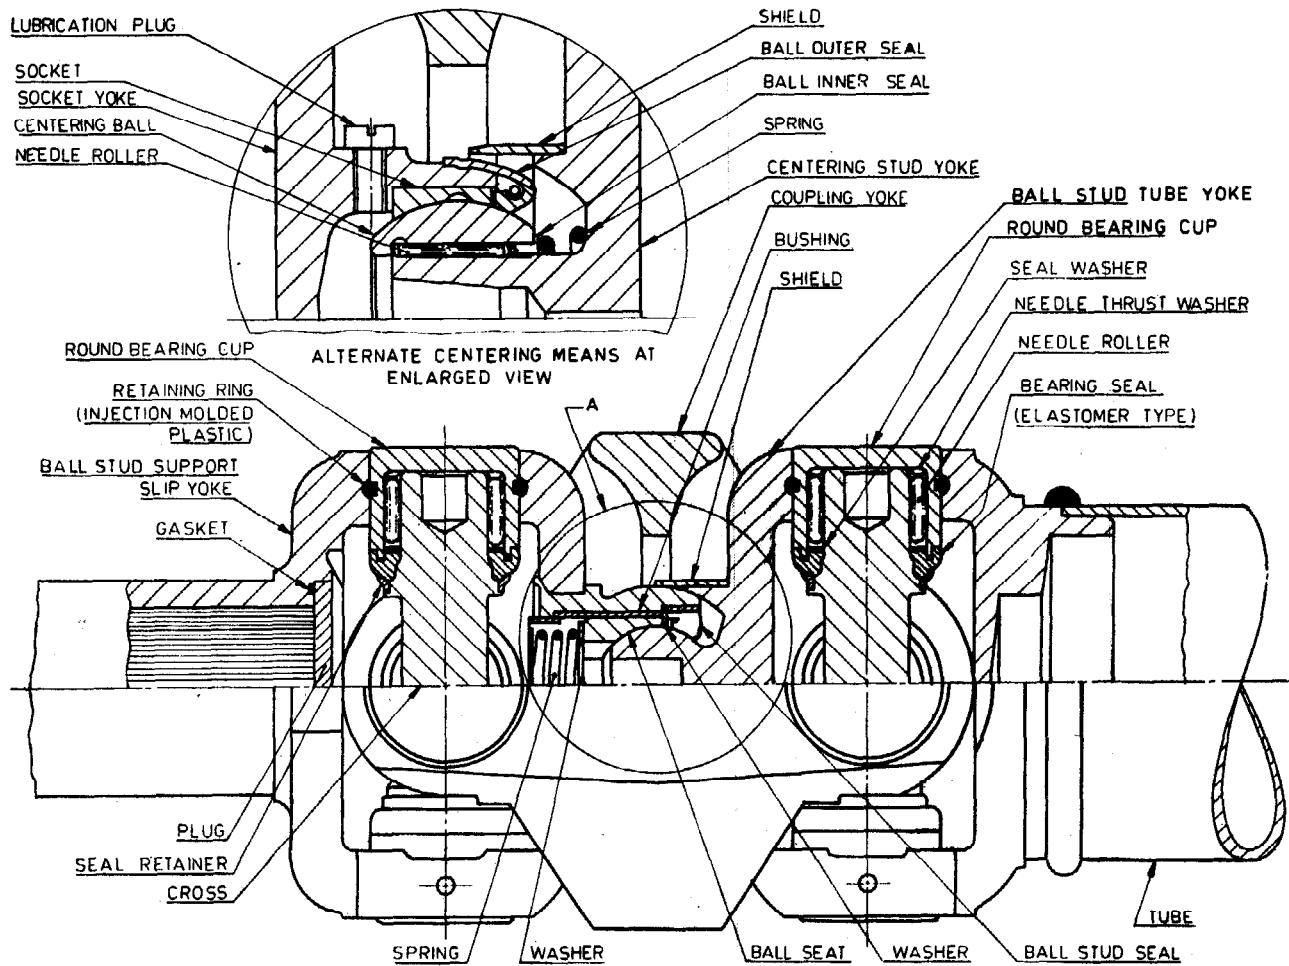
DOUBLE CARDAN UNIVERSAL JOINT
